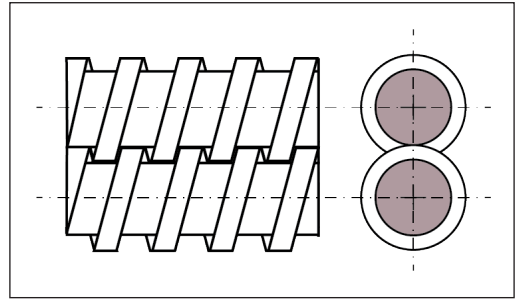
Cylindrical, fully-intermeshing, co-rotating twin-screw extruder
